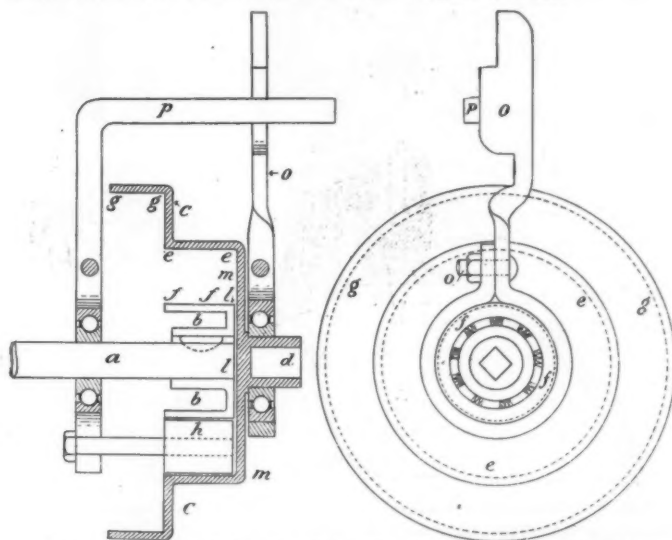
Section and elevation of the Miller friction change-speed gear.
